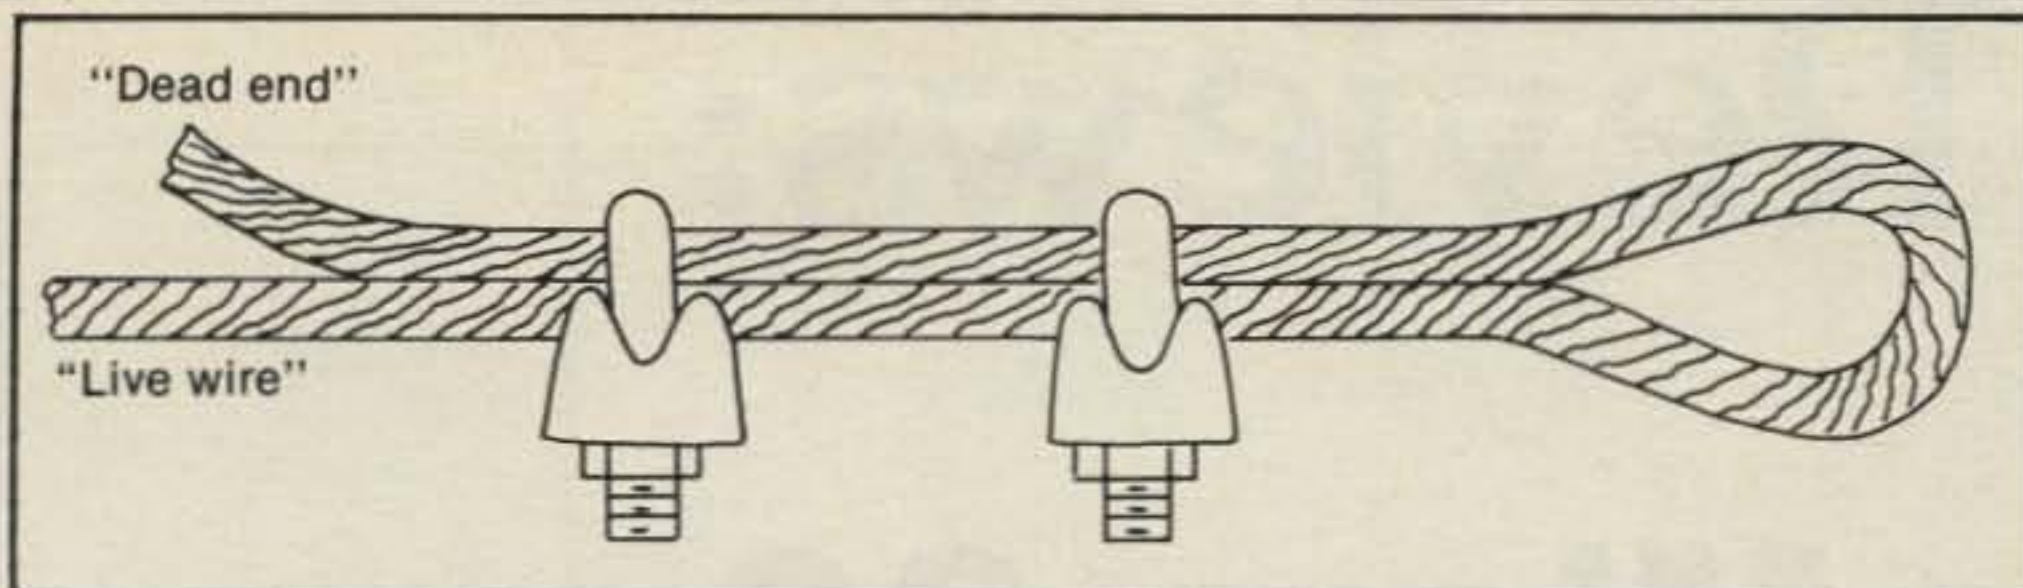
The u-bolt part of the clamp bears on the "dead end" of the guy wire.
